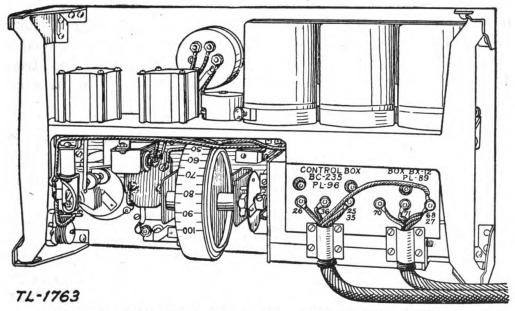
Inside chassis view of radio receiver BC-227 or BC-227-A.
